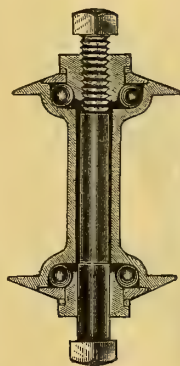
SECTIONAL VIEW OF REAR HUB.
